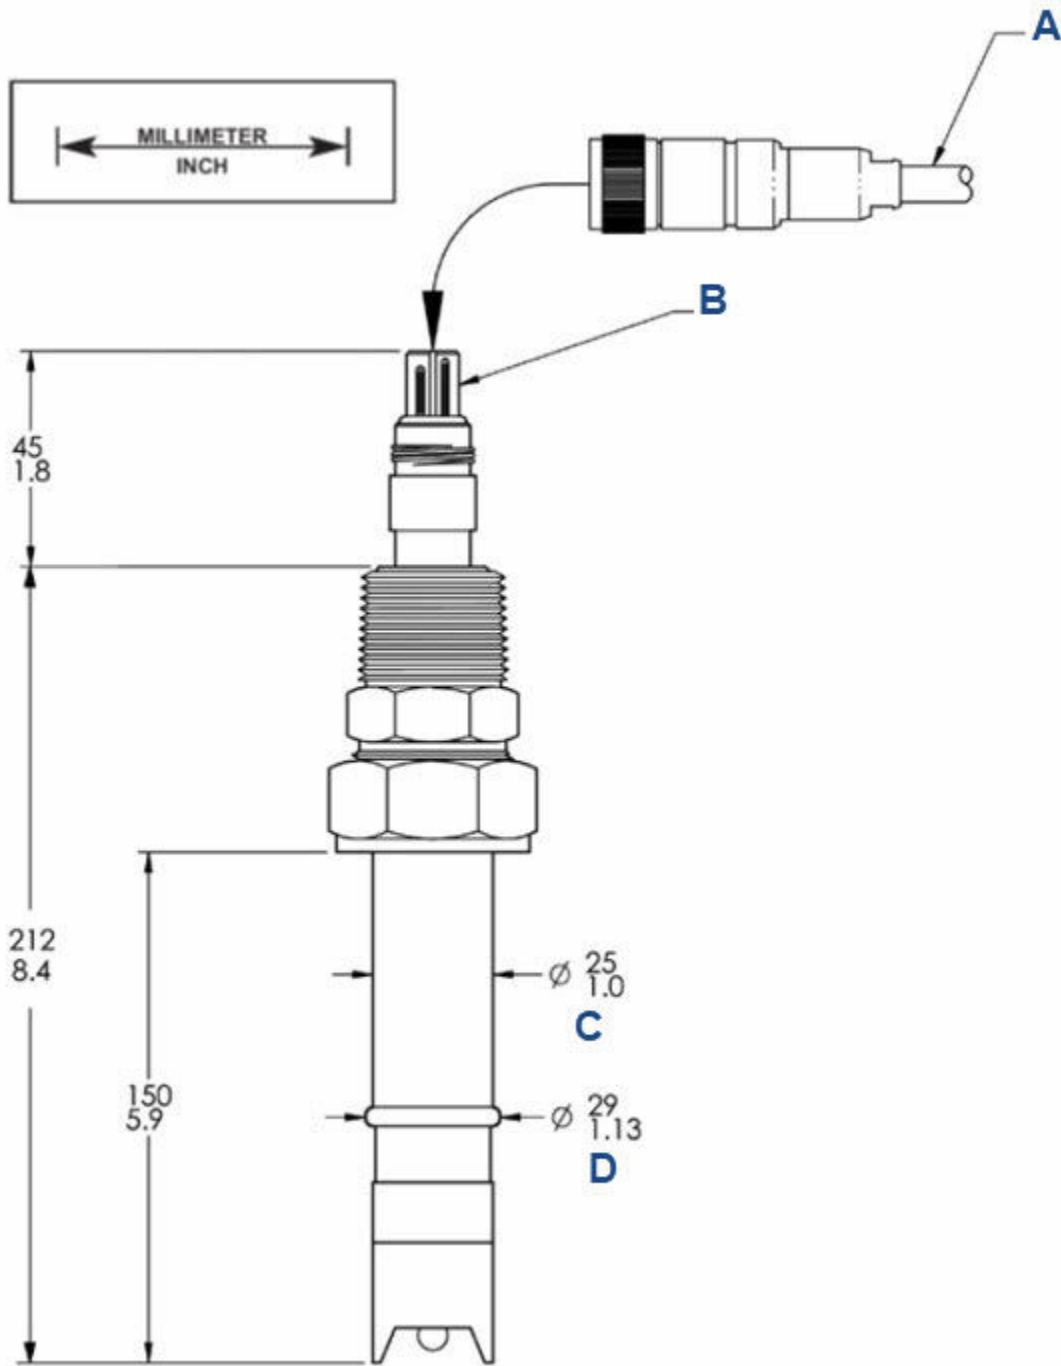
Rosemount 3300HT Sensor Dimensional Drawing: Standard Hemi Bulb Sensor
